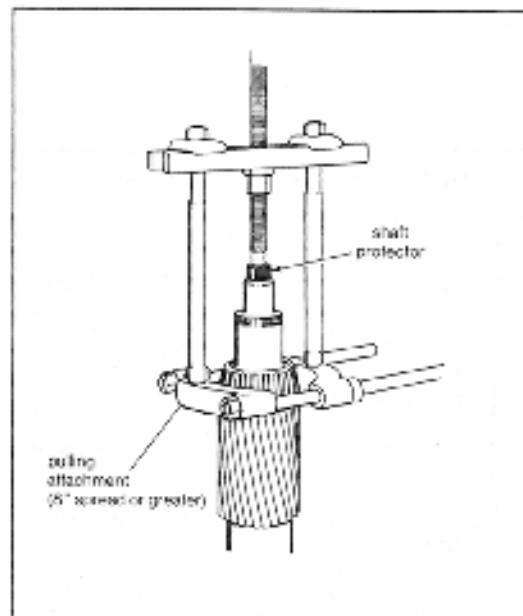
Pulling Rear Pinion Shaft Bearing.
